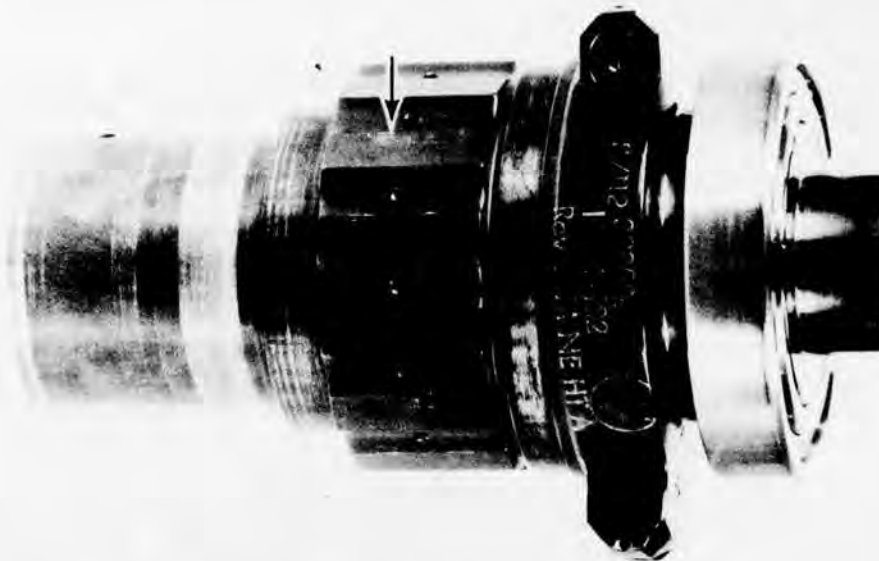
Ramp-Roller Clutch Cam Shaft After Differential-Speed Overrunning Test, Task I.
